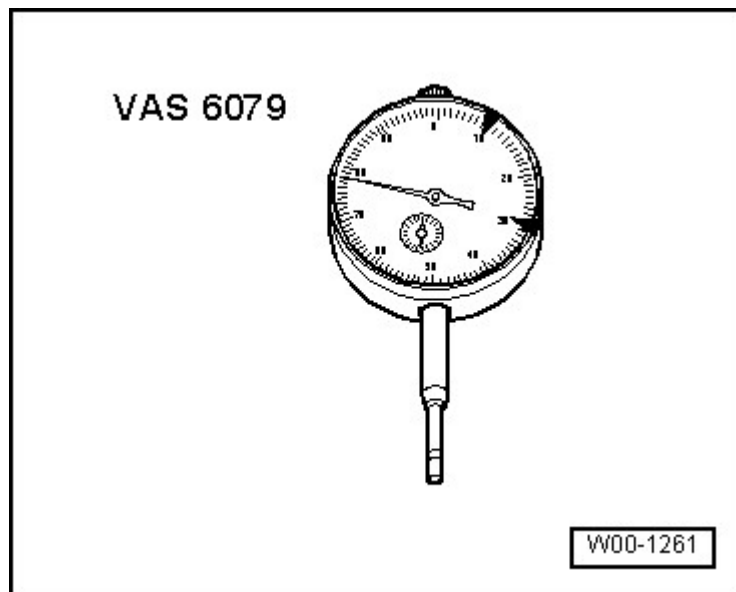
Identifying Dial Gauge 0-10 mm VAS 6079
